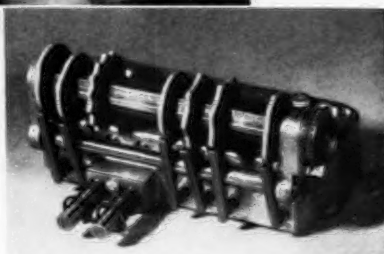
(Right) Selector valve showing cams, valve-operating levers and feathering-valve springs
